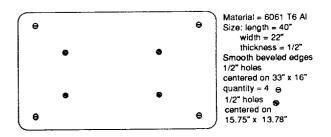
Interface plate Dimensions-Forceplate to Shuttle Treadmill
